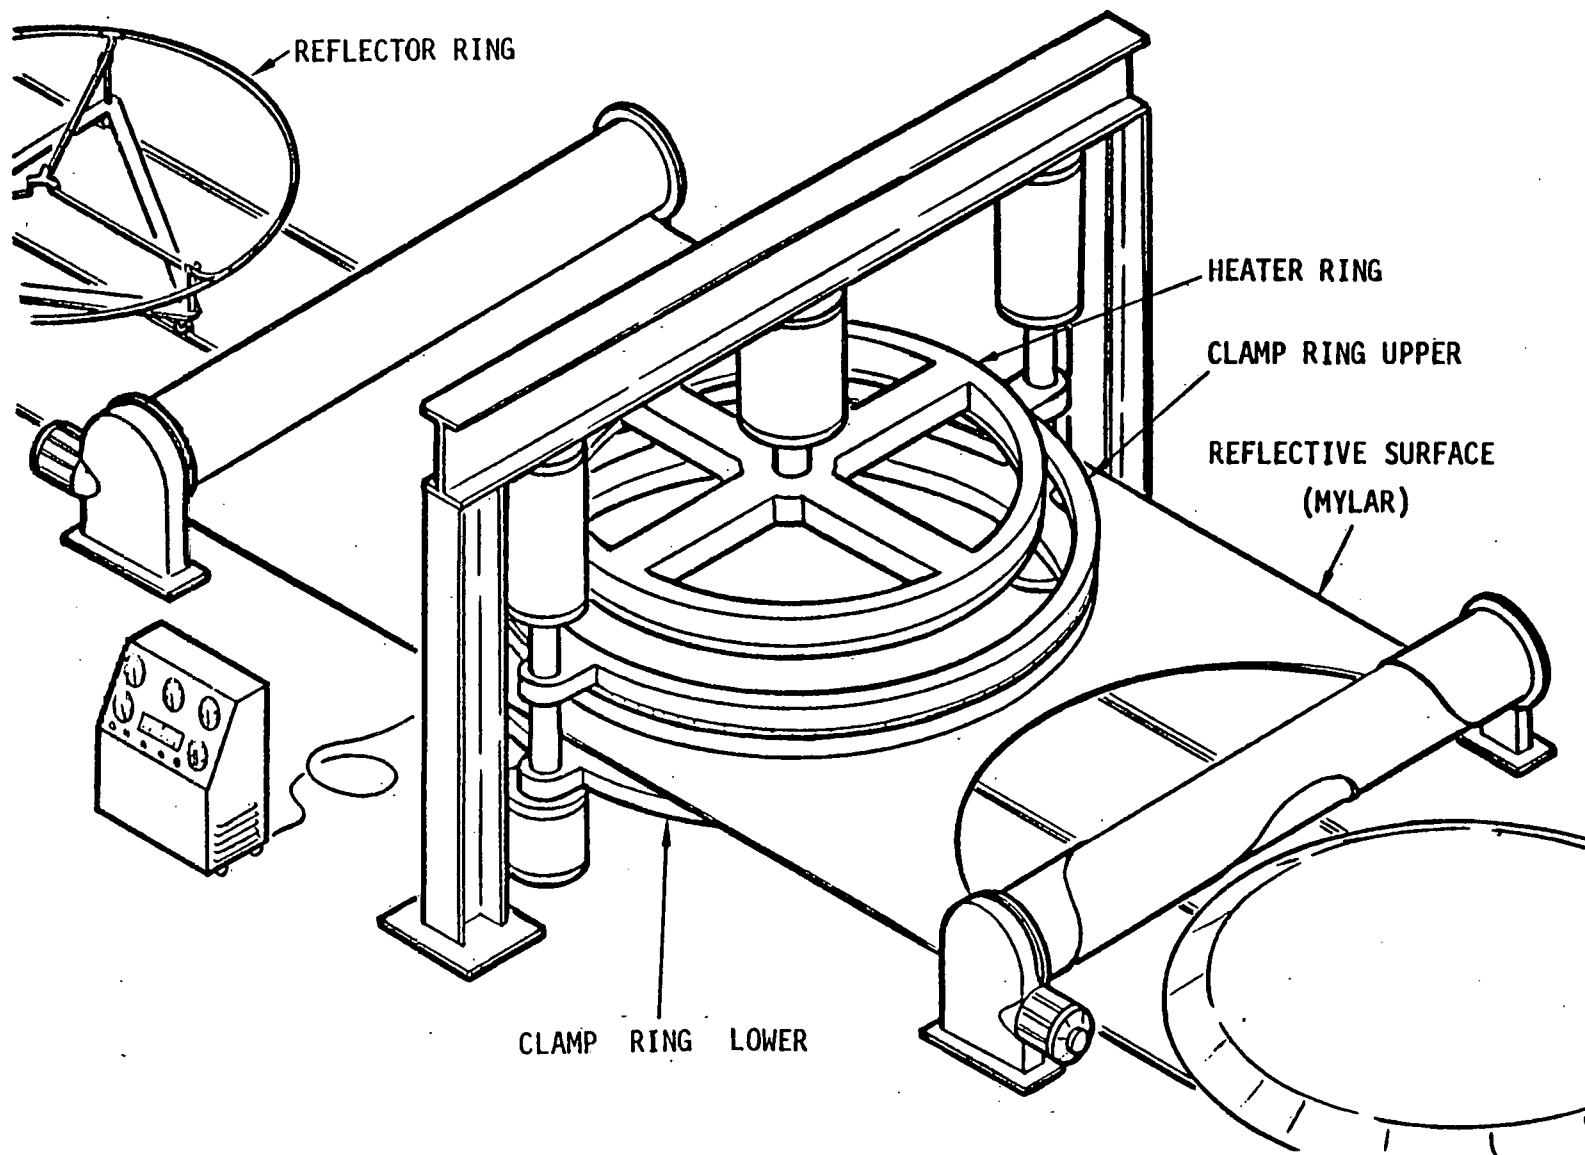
Bonding Reflective Surface to Ring Assembly
